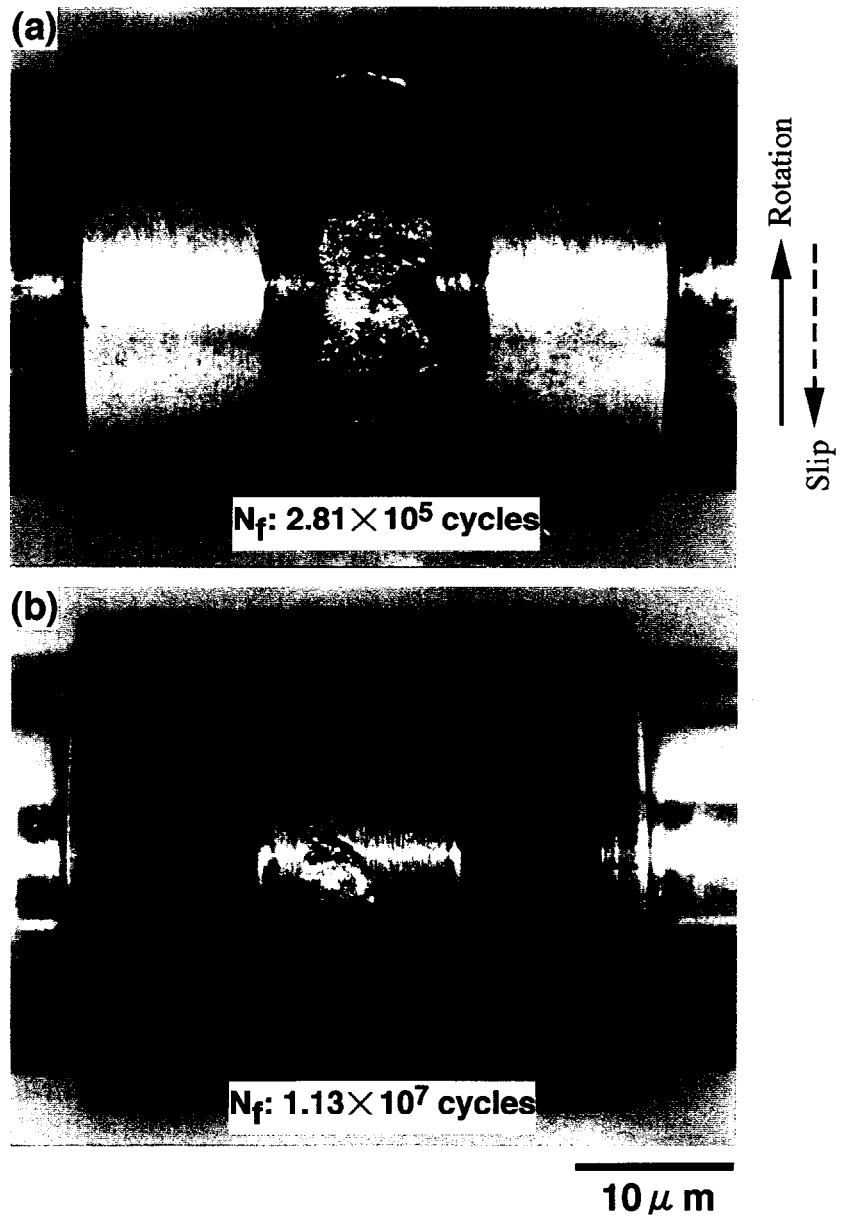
Typical appearances for surface fracture after roller-pitting test in (a) induction-hardened JIS S55C steel and (b) tufftrided and induction-hardened steel F.
